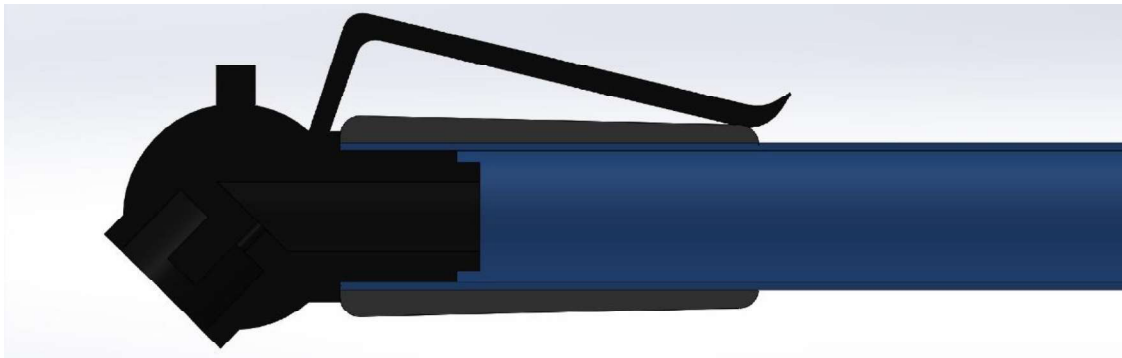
Cross-sectional view of the grip interacting with the barrel and cap.
